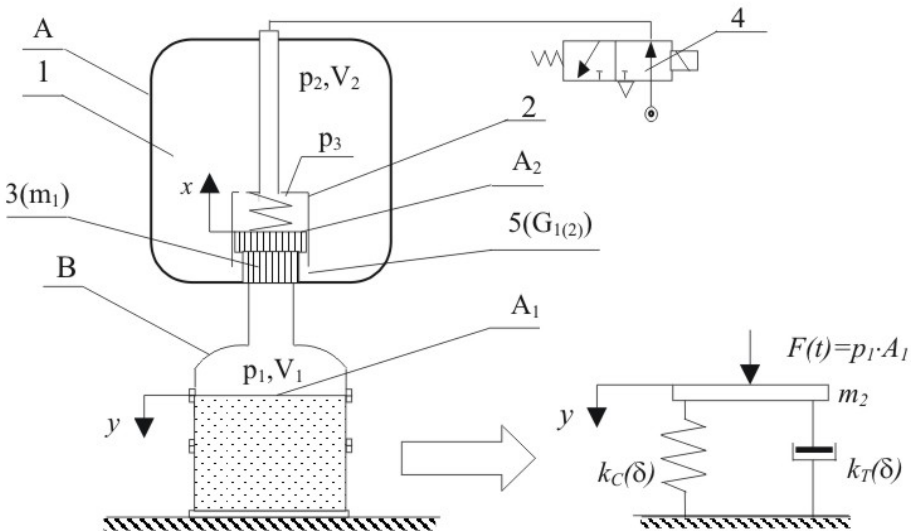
Layout of the process of impulse compacting of moulding sands: impulse head (A): accumulator (1), self-acting impulse valve (2), valve piston (3), distribution valve (4), outlet (5); moulding box (B)
